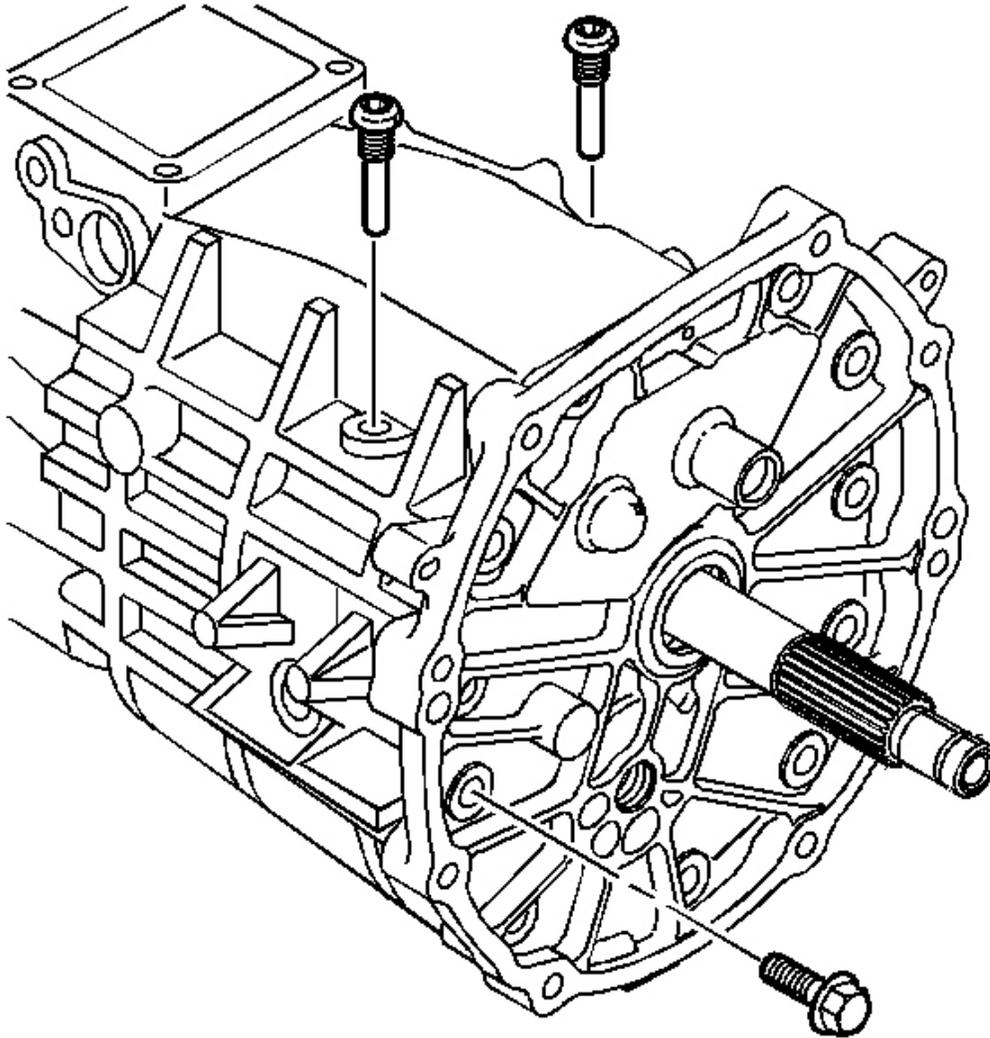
Installing/Removing Shift Lever Guide Bolts
